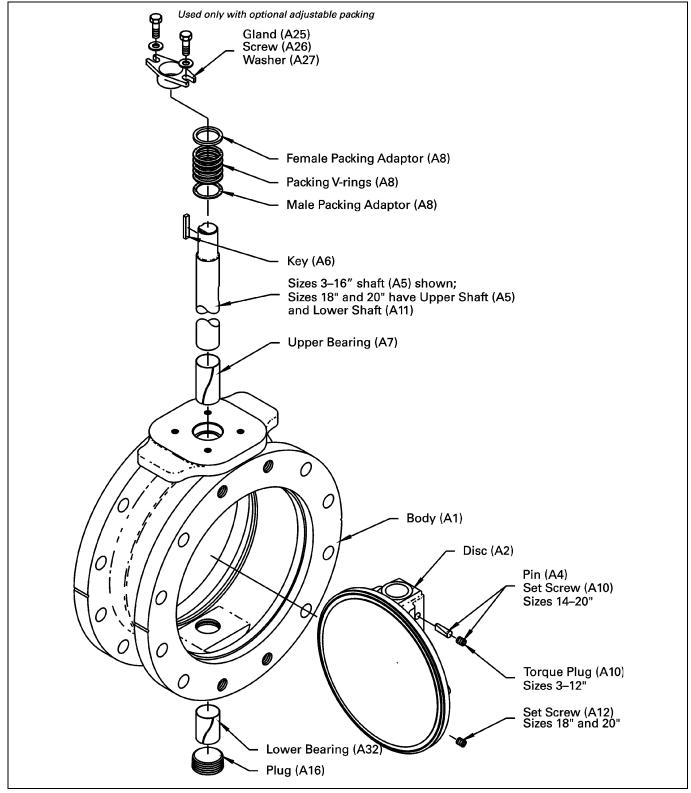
Disassembled 3–20" BAW AWWA Butterfly Valve
